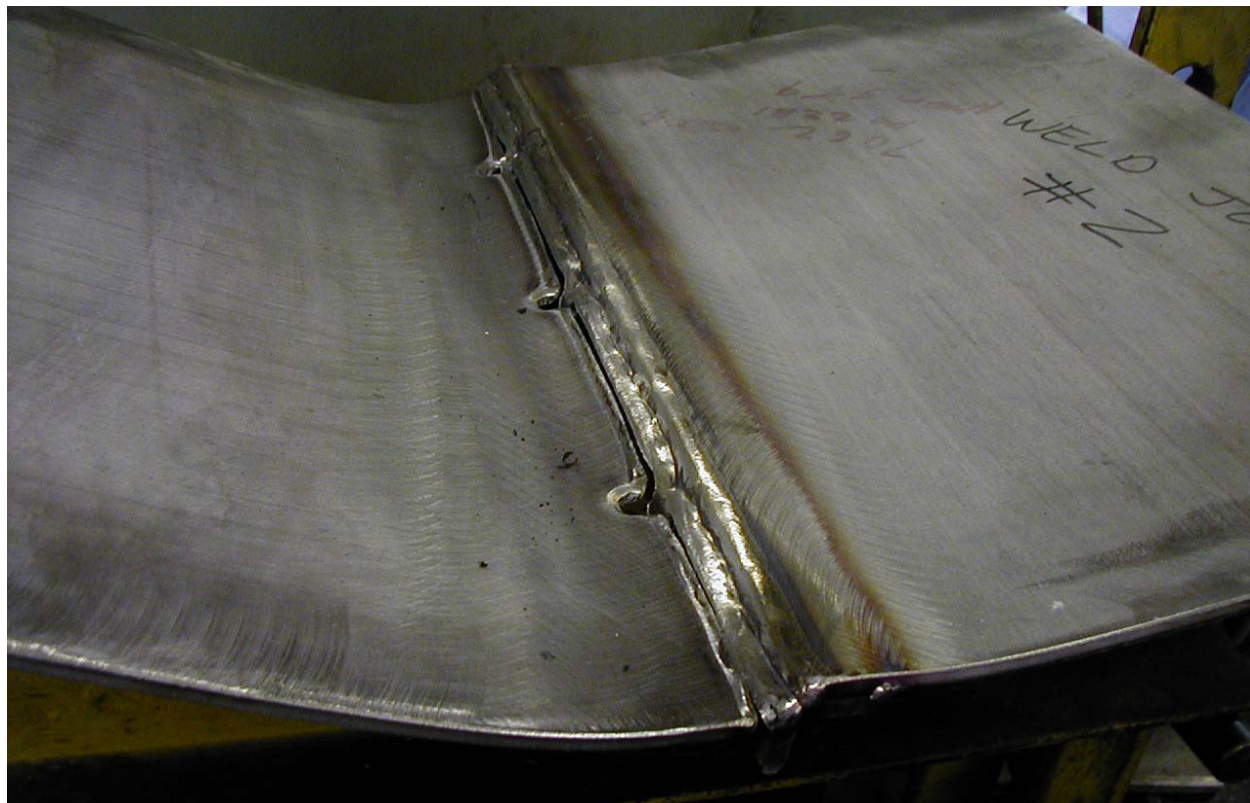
View of Fillet Weld Failure of TS-2
